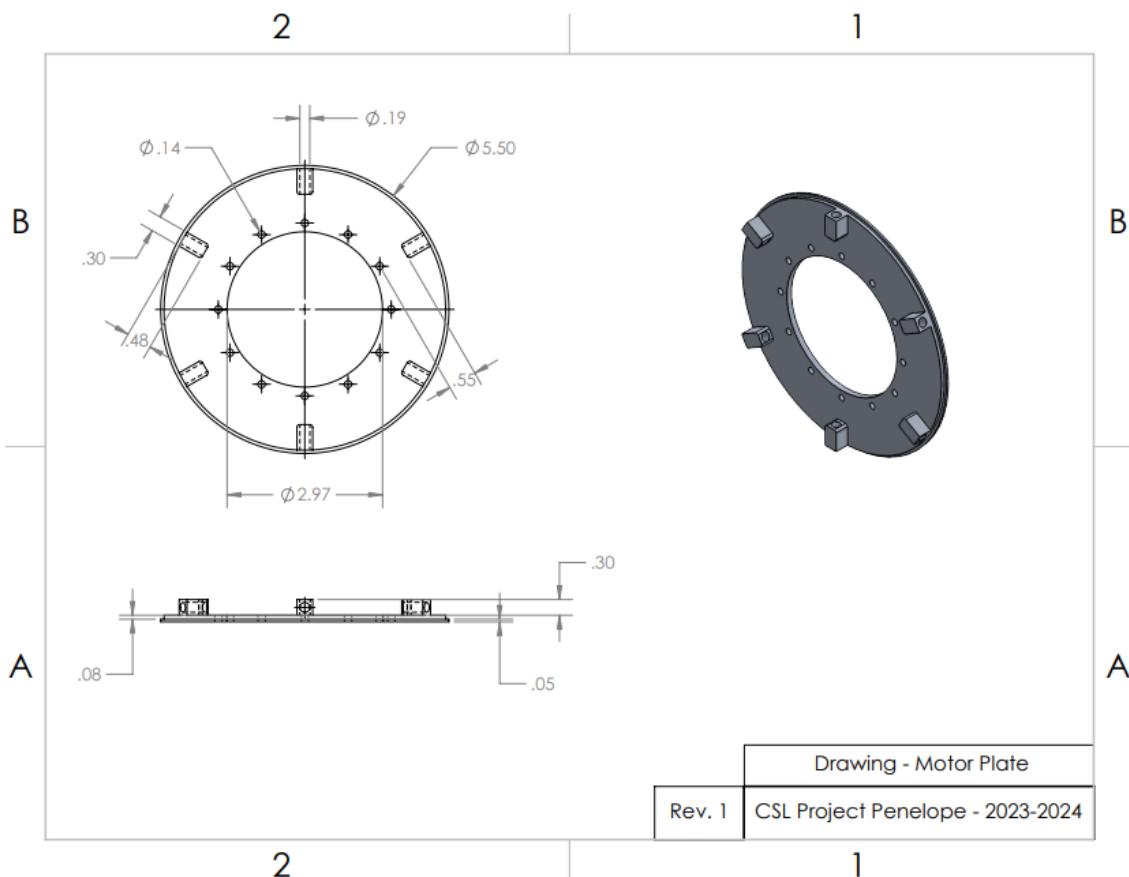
Motor Retention Plate from CSL Project Penelope 2023 – 2024.
